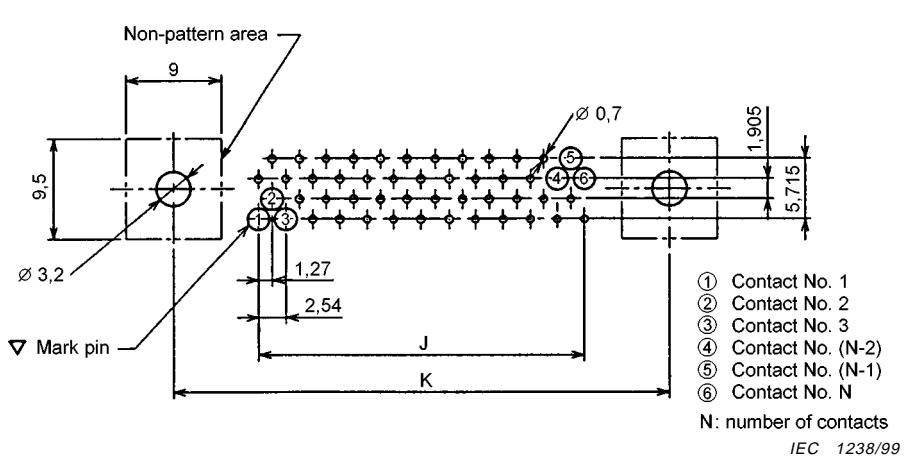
For 68, 80, 96, 100, 110 contacts – Screw lock type
